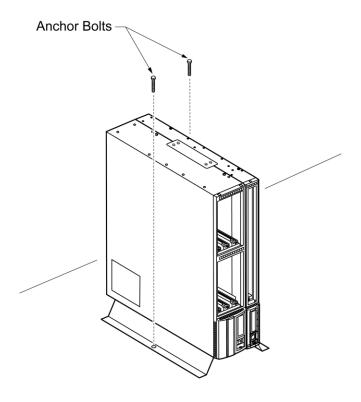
CHS2U-US/CHS1U-US Chassis Stand Mount
